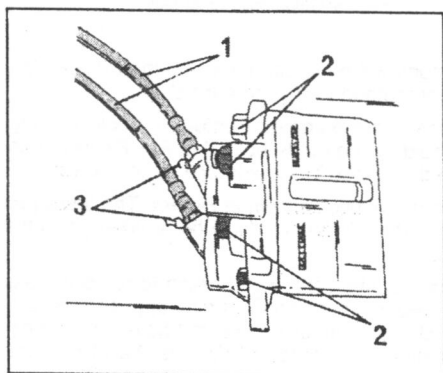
View of the fitted caliper. The bolts (2) must not be slackened or removed, as they keep the caliper halves together.
